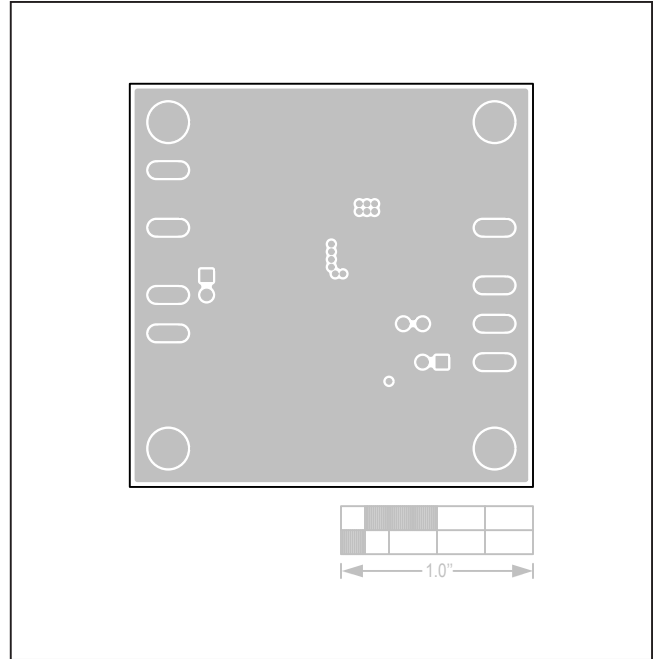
MAX17544 5V Output EV Kit PCB Layout—Inner Layer 1
